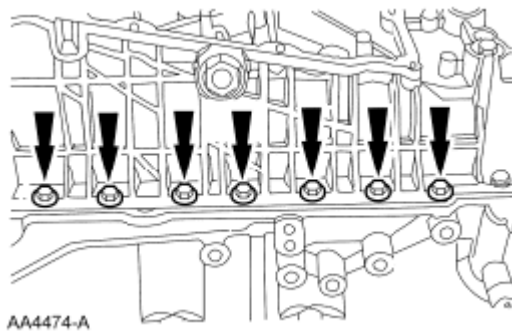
Locating Cylinder Block Cradle Bolts And Nuts
